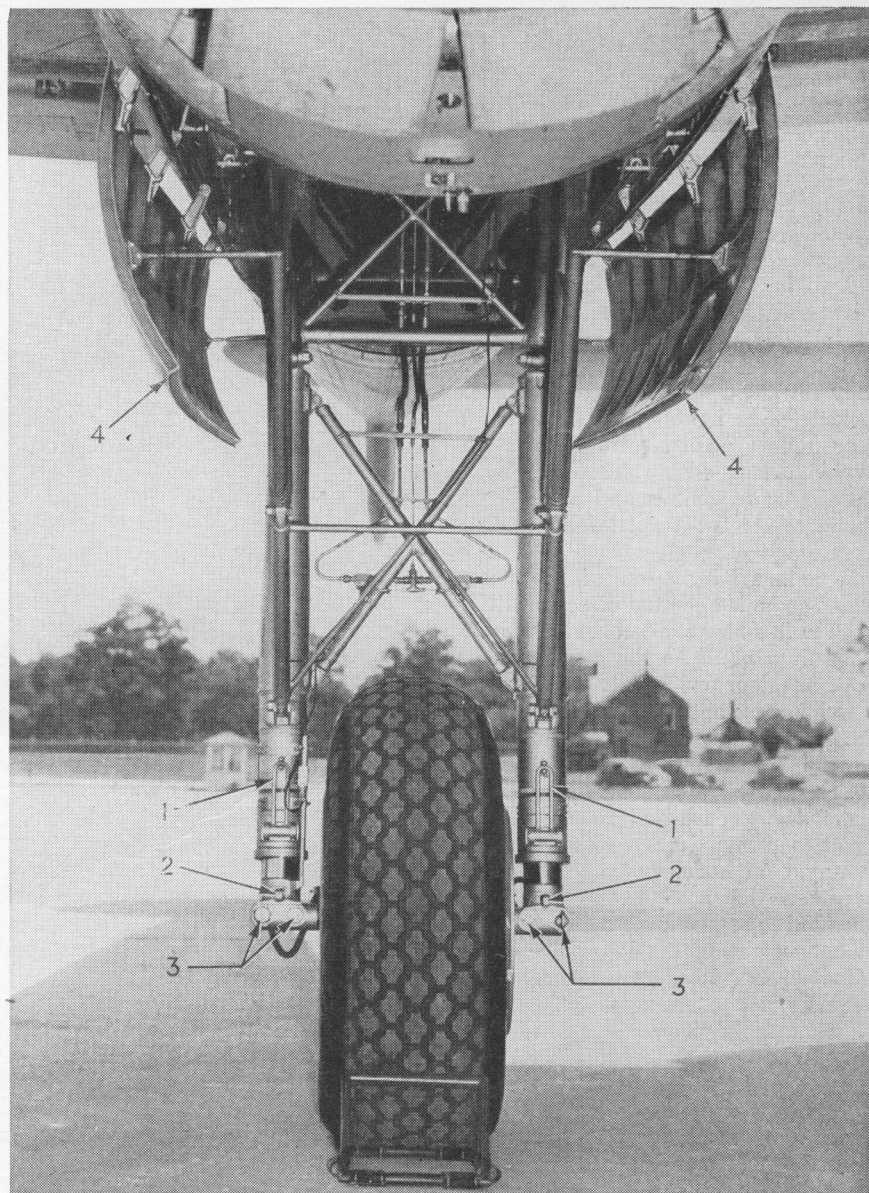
Front view of the main landing gear, looking aft, showing double struts. To facilitate removal and servicing of wheel, link (1) on the cylinder is swung down to engage hook (2) on the piston, attaching bolts (3) are removed, and when the plane is lifted at the jack point (on the cylinder behind the link hinge) link raises the piston away from the axle to permit the wheel to be rolled from under the strut. Doors (4) remain open after the gear is extended.
